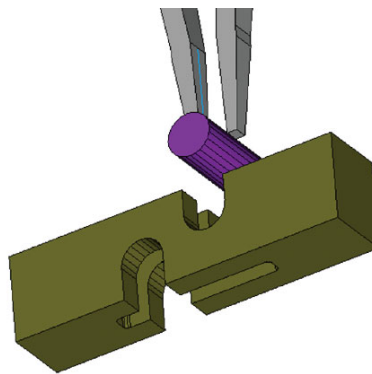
REMOVE THE LOAD BOARD SIDE ELASTOMER USING A NON-METALLIC TWEEZERS.
